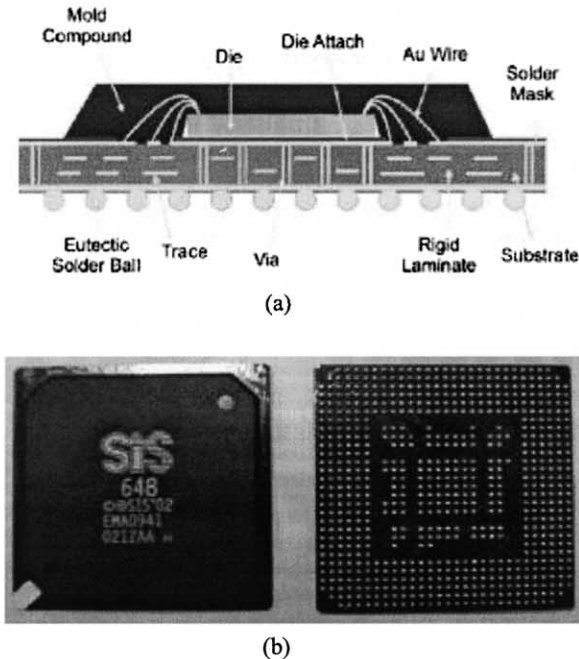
(a) The cross-sectional view, and (b) the top-side/bottom-side photographs, of the 683-pin BGA packaged chipset IC product.
